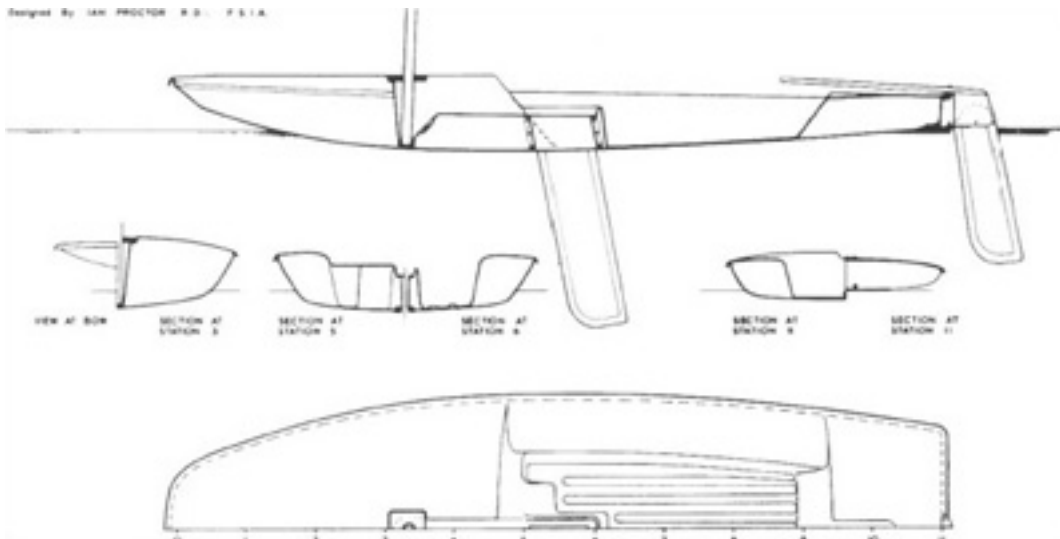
Design of the Topper boat showing monocoque construction for the two halves (deck and hull) which are welded together at the gunwale. This is a scale drawing with dimensions in feet
